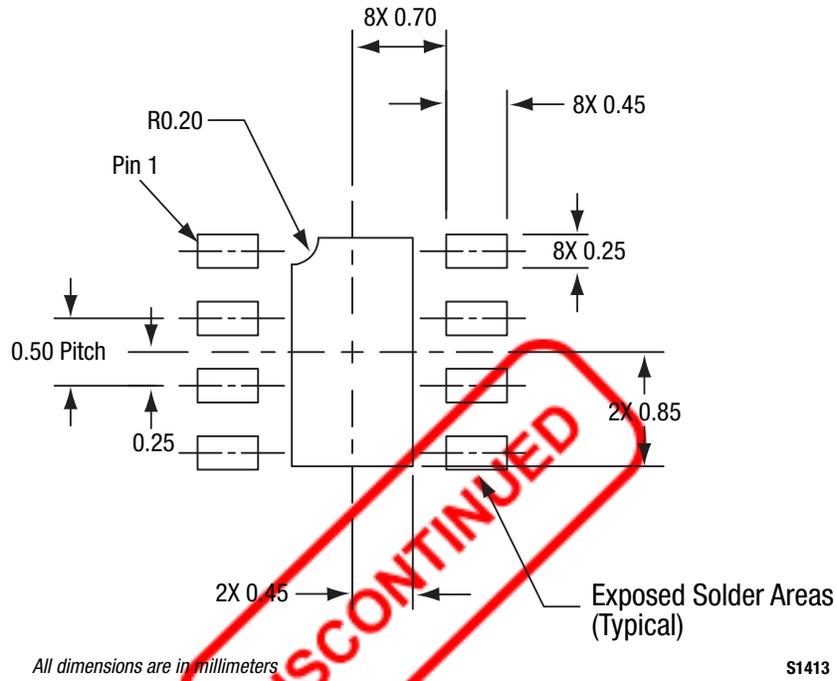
SKY67111-396LF PCB Layout Footprint (Top View)
